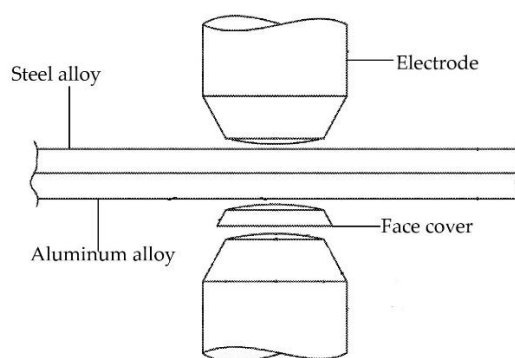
Spot welding arrangement using a weld face cover (Sigler et al., 2015)
